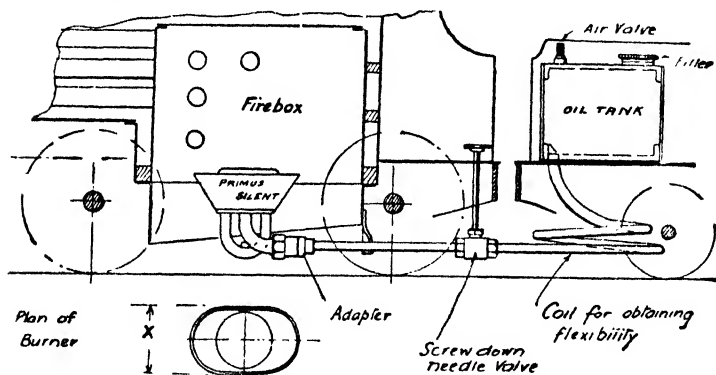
"Primus" Vaporising Petrol or Oil Burner fitted to a Model Locomotive.
